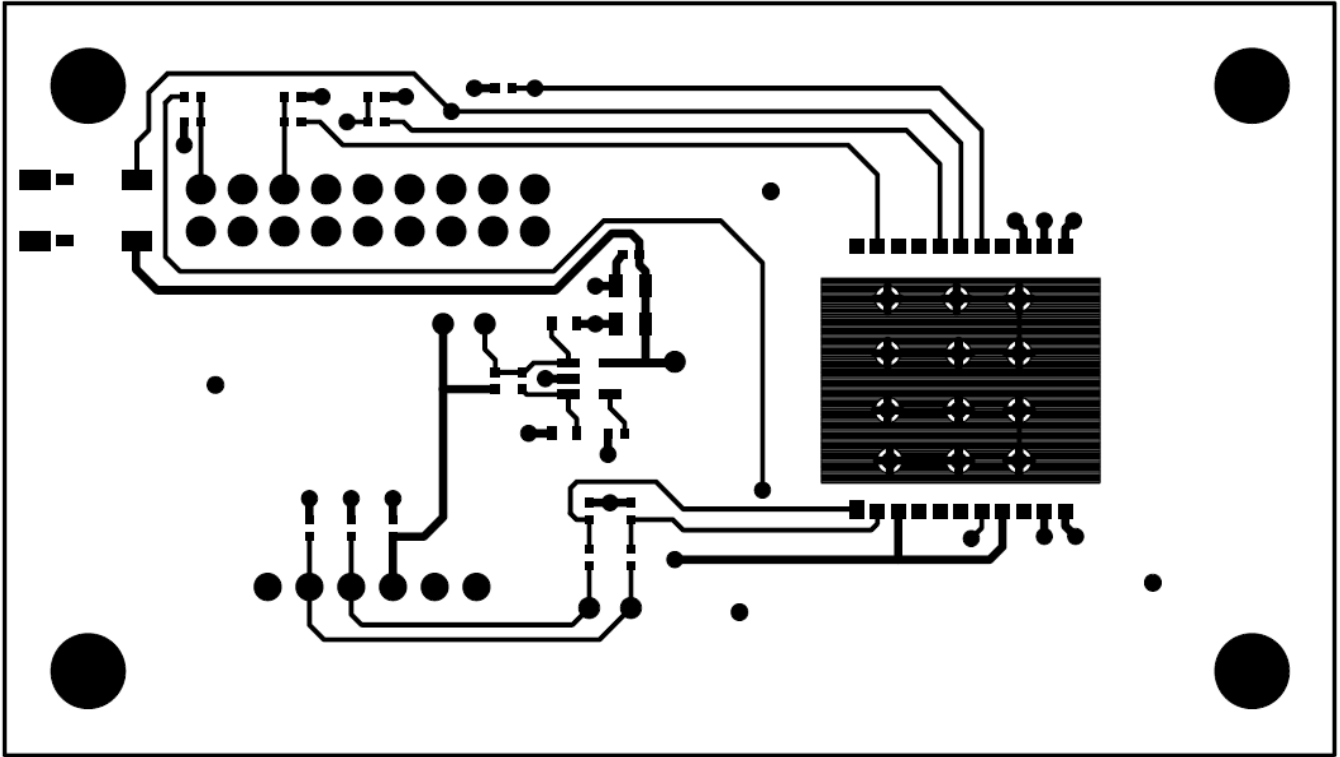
MAIN BOARD TOP LAYER ROUTING
